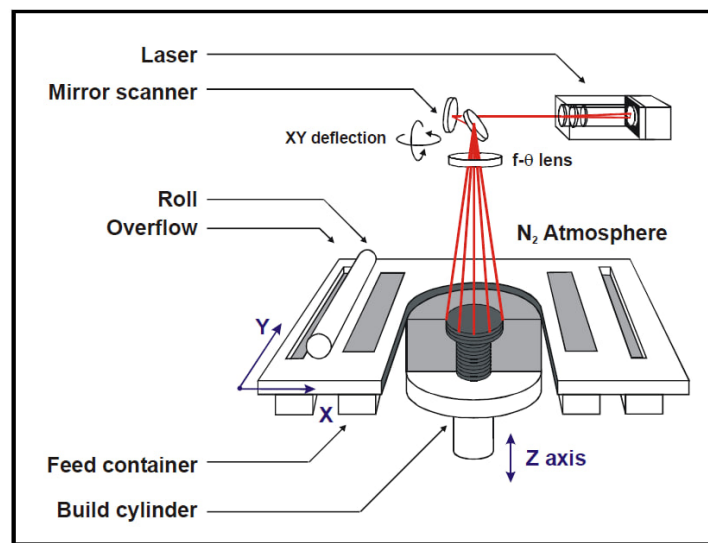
Scheme of a commercial selective laser sintering machine [23].
